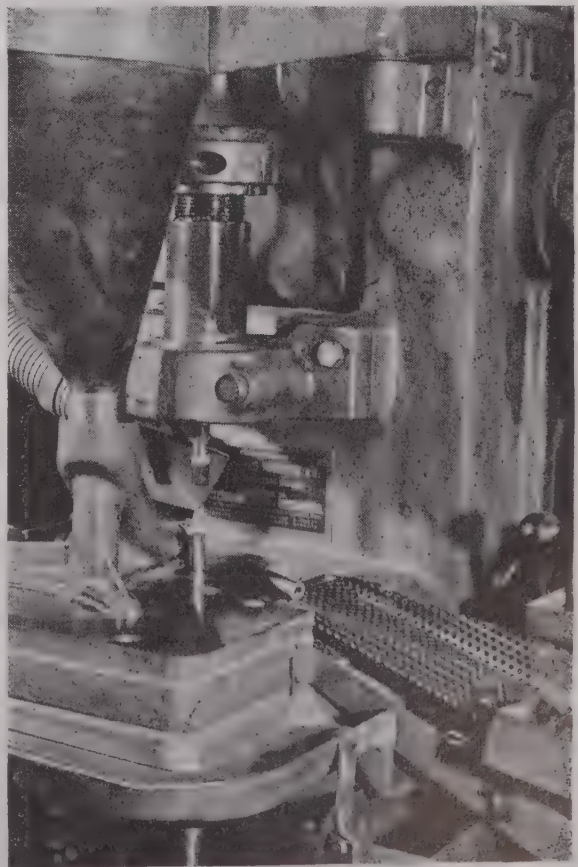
Closeup of the bed and adjacent parts of a compacting machine. A bushing just compacted is being ejected from the die and will be pushed by the oscillating shoe into the perforated chute at right. Excess powder pushed into the perforated chute falls into the solid chute below it and is collected for reuse. Exhaust hose, shown at left, draws dust to a collector.
